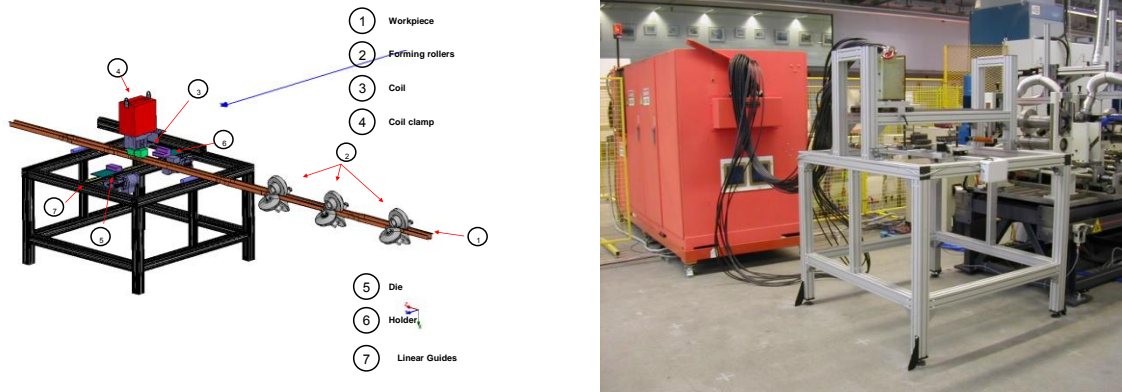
EMF stand incorporating a coil that releases forming energy to moving workpiece (right)
